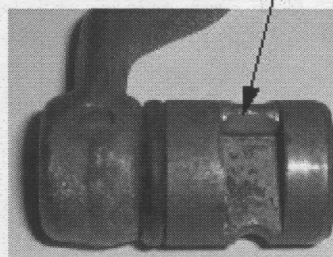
Figure F - cam assembly showing worn pin that is common on KTM engines after 20 years.
